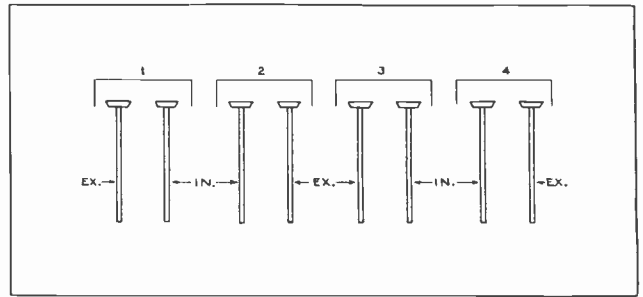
This simple sketch shows the order or arrangement of exhaust and intake valves which is used on practically all automobile engines. Knowing this arrangement will be a great help in locating certain valves when timing an engine.
